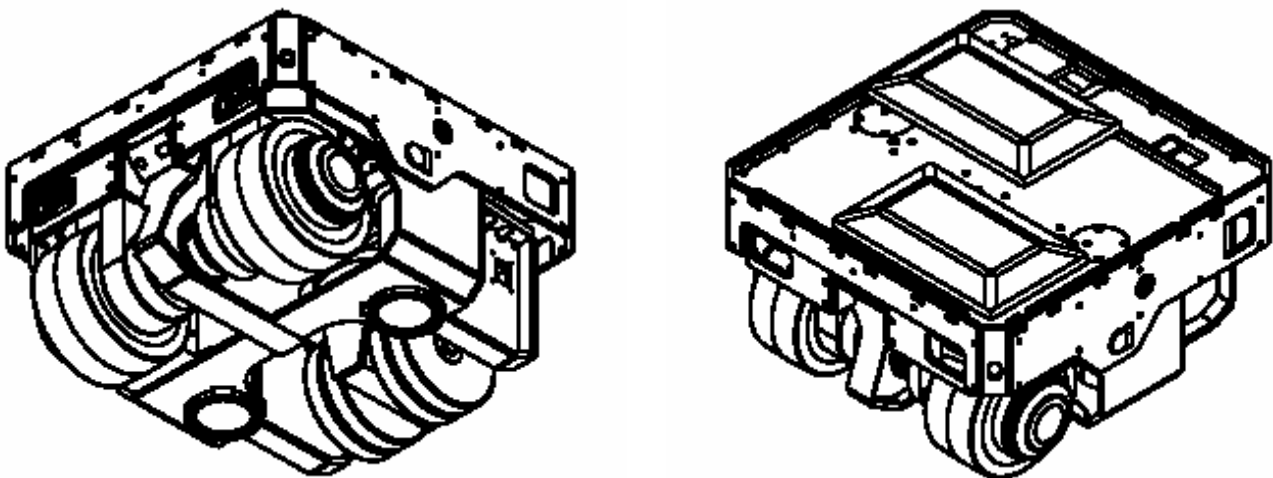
Three dimensional, bottom and top view of the buggies.
